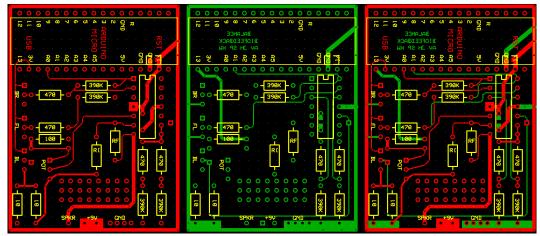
Layout of the PCB ordered from ExpressPCB. Left: The copper traces (red) on the component side of the board. Center: The copper traces (green) on the back of the board. Right: Both sets of copper traces stacked to show connected components. The Arduino Micro would be placed at the top on the component side (red) of the board.
